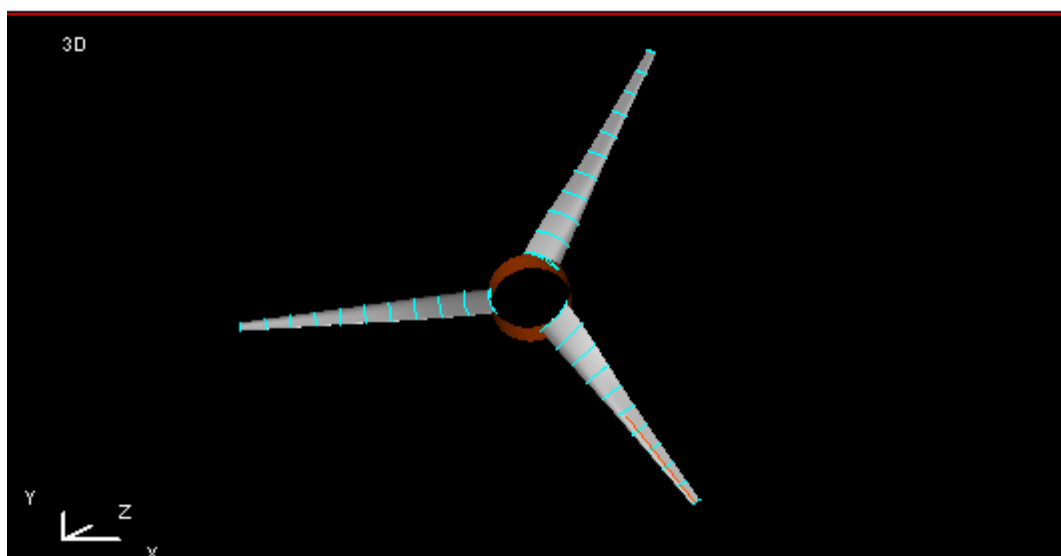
Geometry of 25 kW wind turbine blade, AutoBlade™
